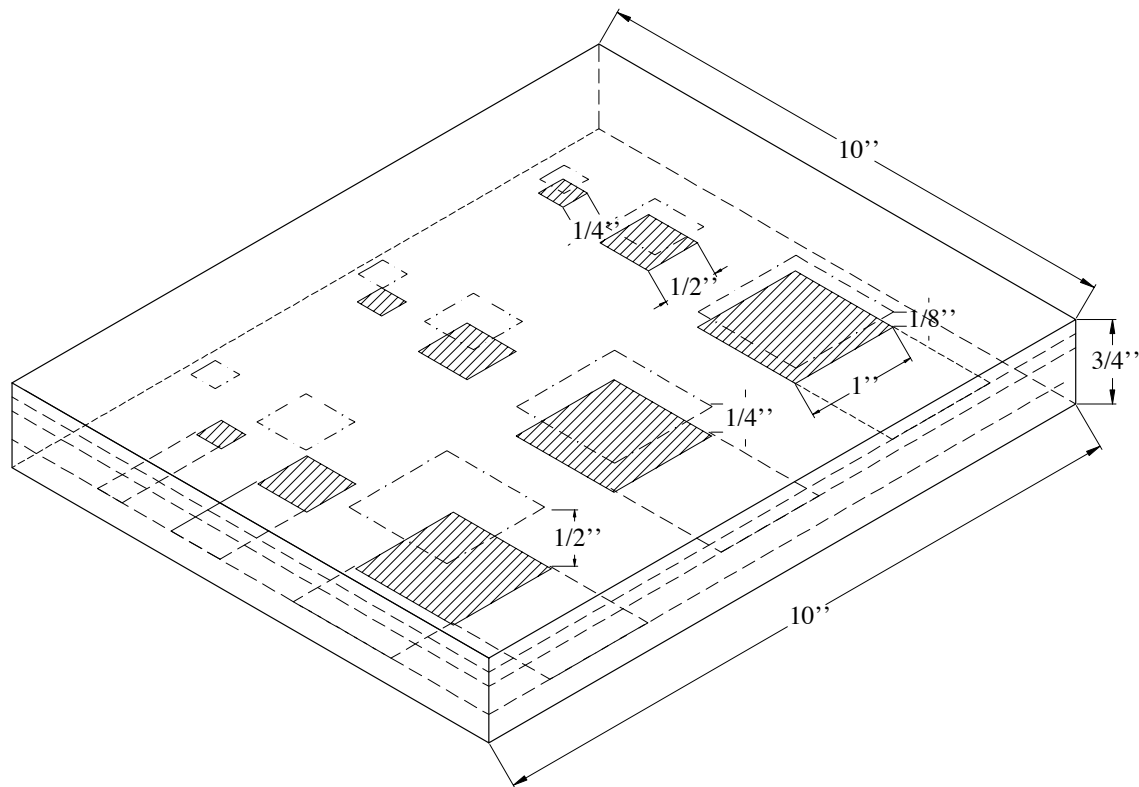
Sketch of position of artificial defects in glass fiber reinforced epoxy composite test sample.
